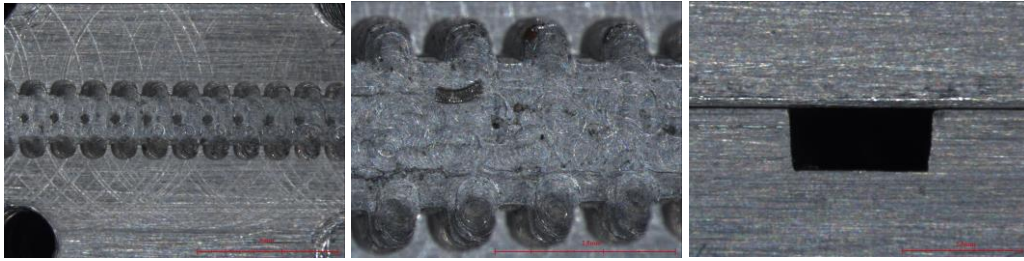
Optical microscope image of the first test structure on the aluminium block. Initial milling trials were done in aluminium with a low-cost carbide tool. Specifications of the toll are 0.010" cutter diameter, 0.050" length of the cut, 0.050" overall reach and 3 flutes. The selection of the tool was made based on the space between them. The diameter of the tool must be less than the space between the parts to be made. The manufacturing and measurements were done with the facilities at Lancaster University. The initial trails produced a very poor quality of parts. The optical images revealed the manufacturing errors, such as missing small features of the E-plane corrugations in the coupler region, improper vertical profiles of the parts, curved 90⁰ corners, and a very poor surface finish. The errors are due to the cutting force induced errors, servo errors, force and stress, and the geometrical deviation of the machine tool structure.
